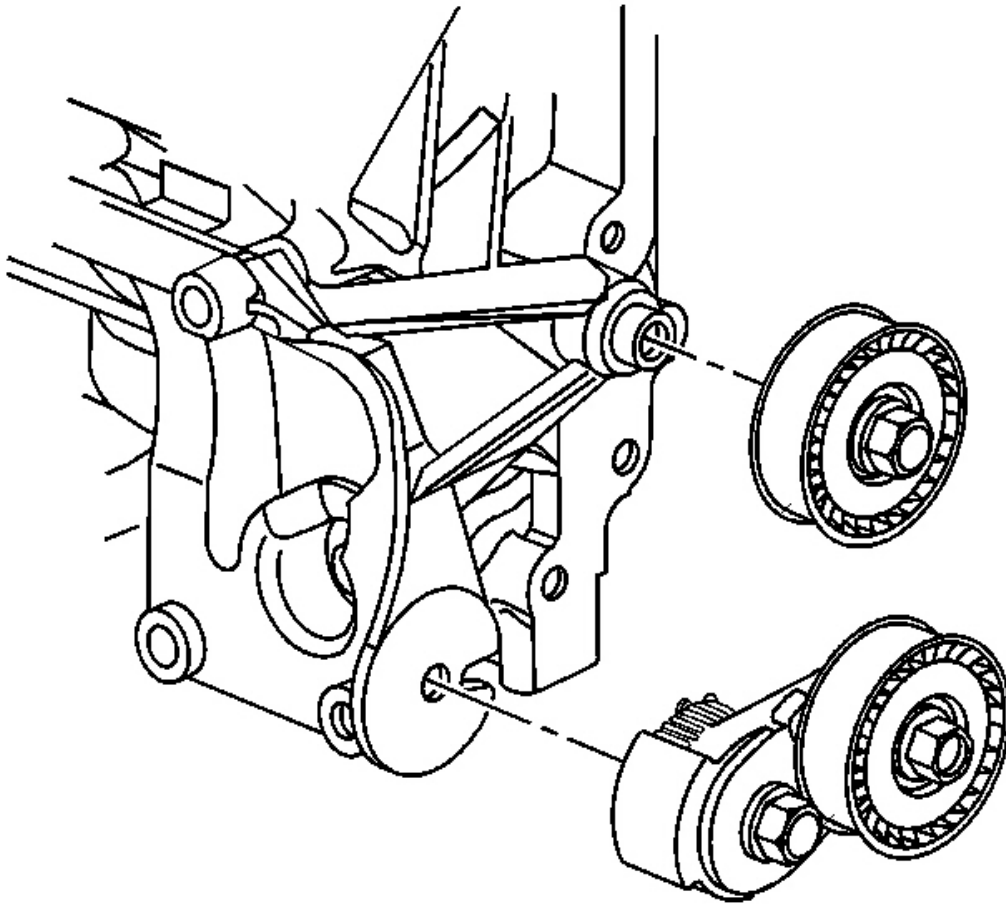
Compressor Drive Belt Tensioner & Compressor Mounting Bracket
